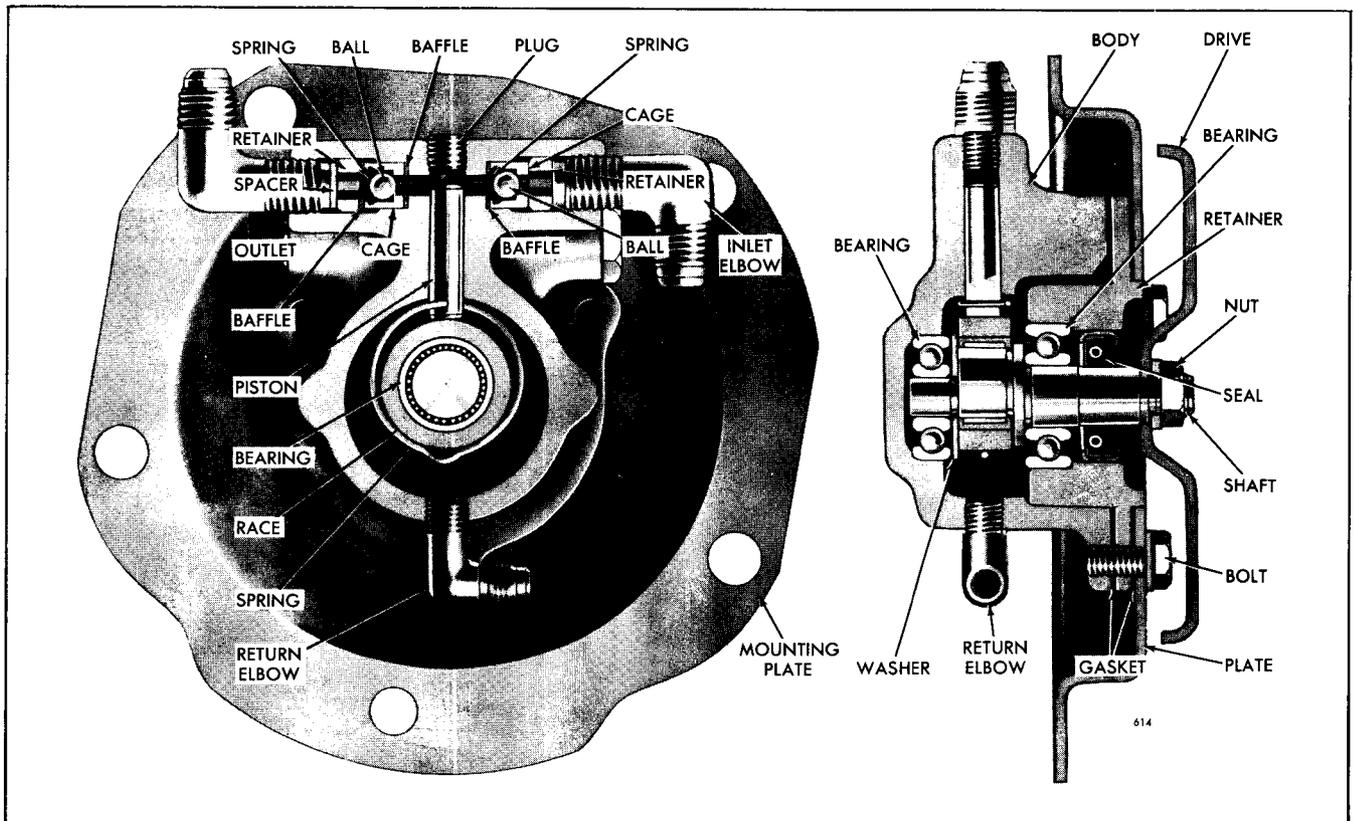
Direct Engine-Driven Hydrostarter Charging Pump
